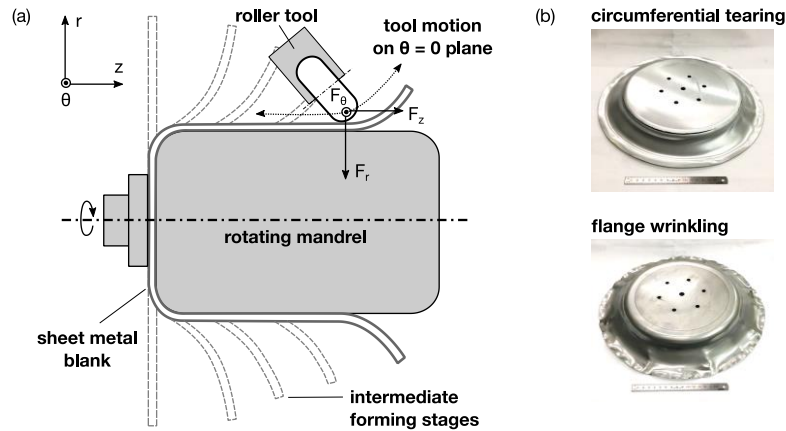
(a) The conventional sheet metal spinning process, in which a roller tool moving on a plane progressively forms a blank onto a rotating mandrel; the tool forces are noted. (b) Photographs of workpieces showing the two main modes of failure in spinning: tearing and wrinkling.
